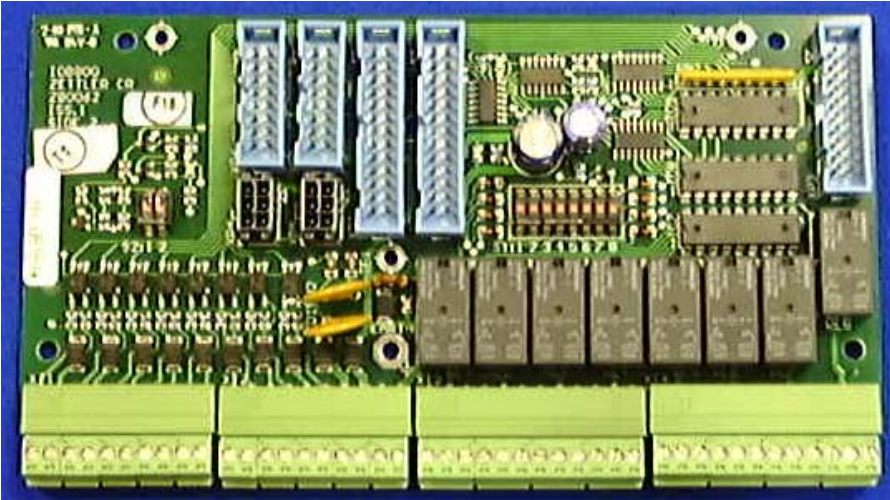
IOB800 Standard 8in/8out Expansion Board
